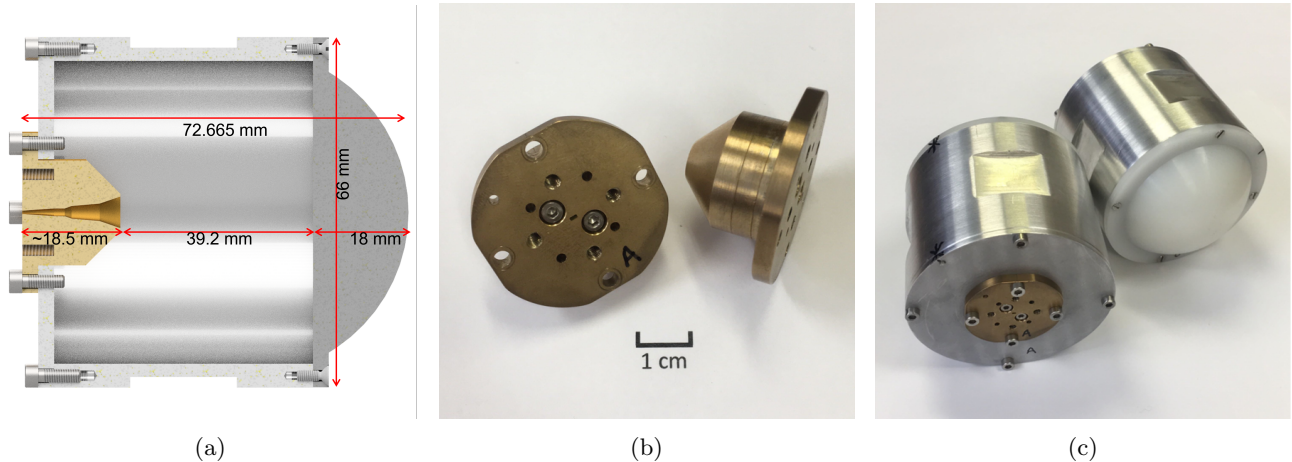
GOLA design and manufactured components. (a) Shows a cross-sectional view of the GOLA assembly, consisting of brass feedhorn, aluminum housing, and HDPE lens. (b) Shows both manufactured feedhorns and (c) shows both of the final assembled GOLAs.
